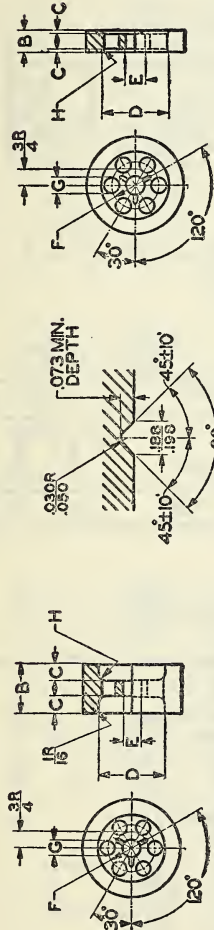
Plain cylindrical plug gage handles, reversible design, range above 1.510 to and including 4.510 inches
